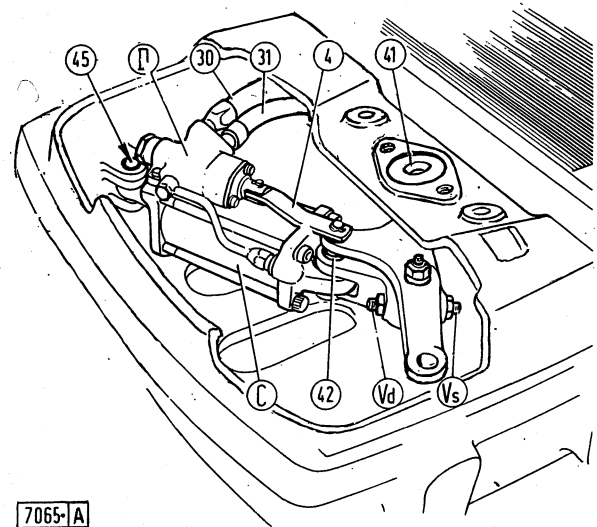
Power-assist cylinder and control valve installation in front axle mounting.
